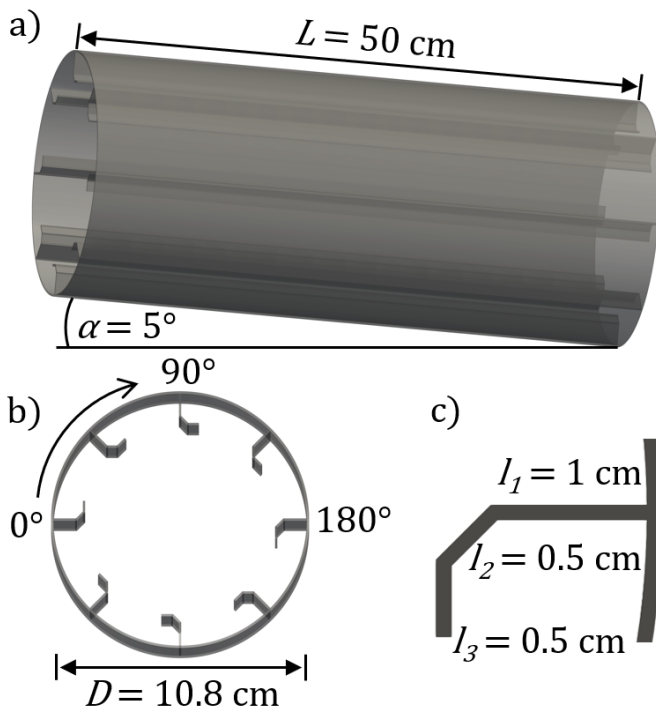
Geometry scheme of the rotary drum: a) side view; b) front view; and c) detail of a flight.
